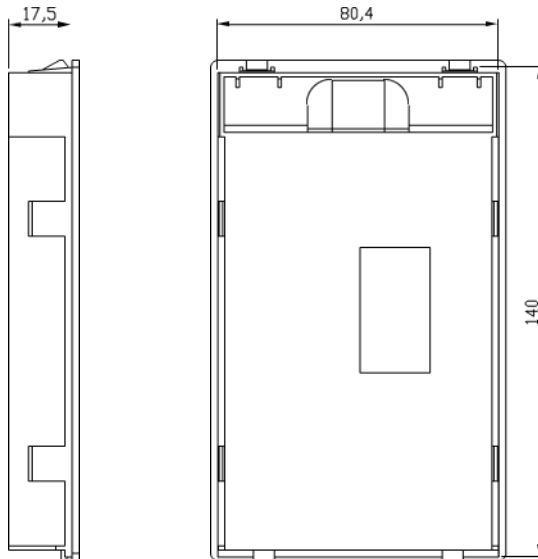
Dimensions of the external keypad bracket of 22kW above (unit: mm)
